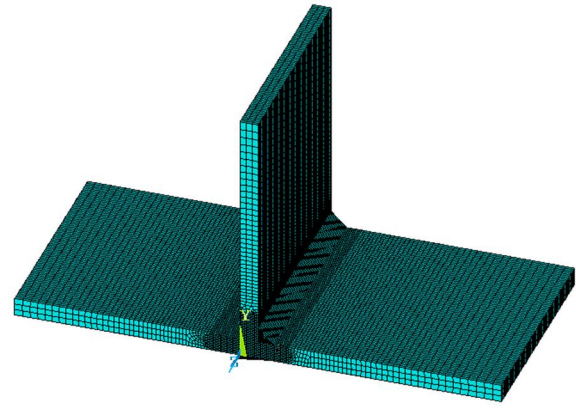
Finite element model for the fillet weld of 6mm-thickness plates
